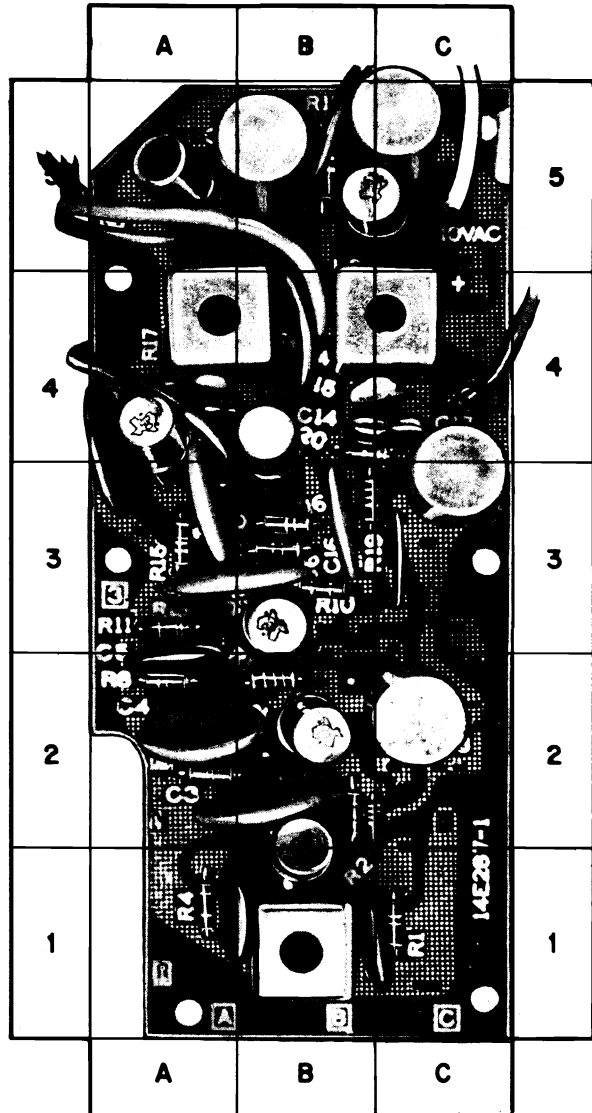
View of Component Side of Etched Circuit Board 14E287-1. See Parts Location Table "C".
